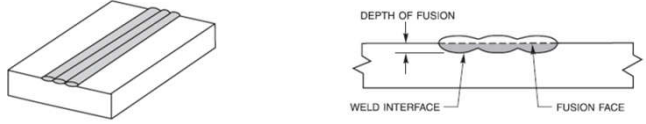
(C) shows a 3D perspective view of a surfacing weld on a rectangular block. Figure B30(C) shows a cross-sectional view of a surfacing weld with labels: DEPTH OF FUSION, WELD INTERFACE, and FUSION FACE.
